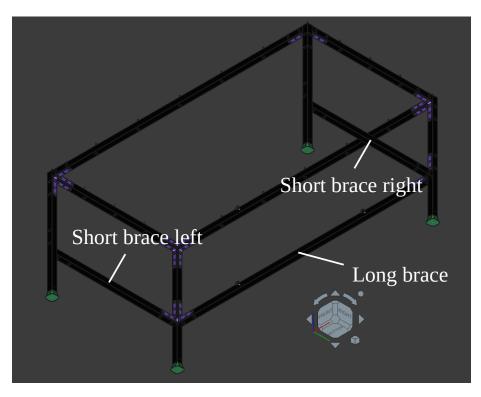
CAD view of the steel frame alone, three-quarter bottom view.
